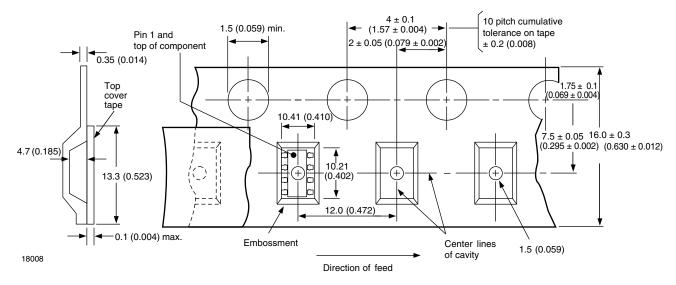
Tape and Reel Packing (1000 pieces on Reel)
